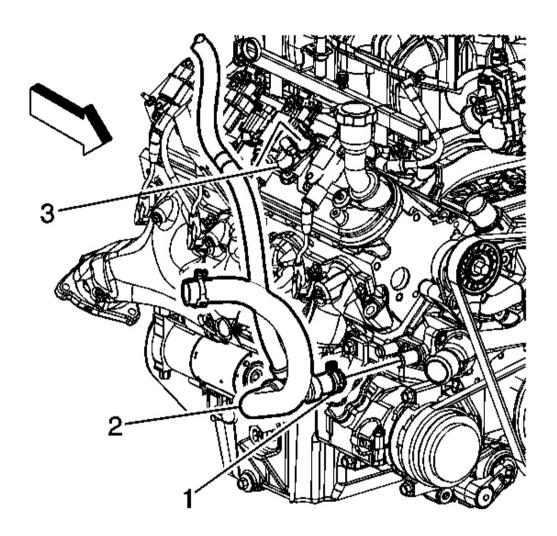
View Of Heater Inlet Hose, Clamp & Waterpump Courtesy of GENERAL MOTORS CORP.
